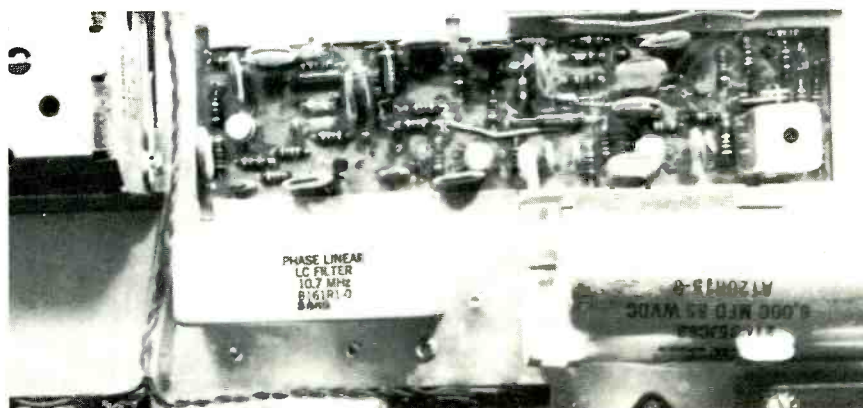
Detailed view of FM section shows sealed phase-linear toroidal Butterworth band-pass filters. Only tunable item on I.F. strip is detector transformer at extreme right.
